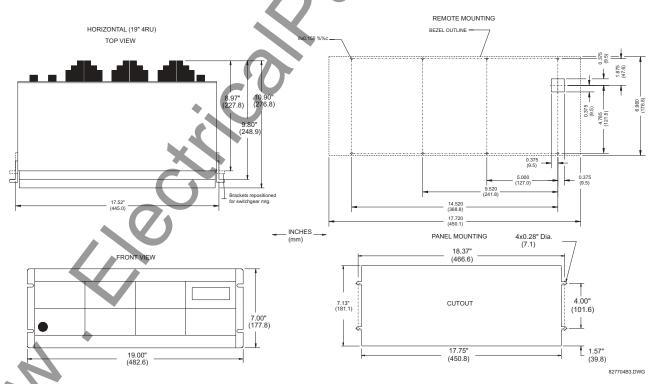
C60 HORIZONTAL MOUNTING AND DIMENSIONS
